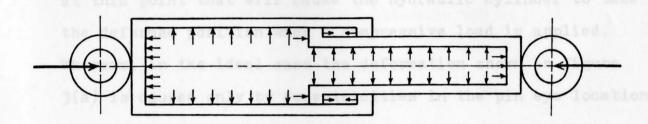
(a) Hydraulic Actuating Cylinder Under Compressive Load.
